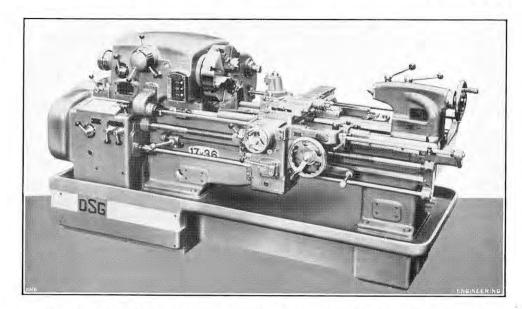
17-in. Swing Precision Tool-Room Lathe; Dean, Smith & Grace, Ltd.
